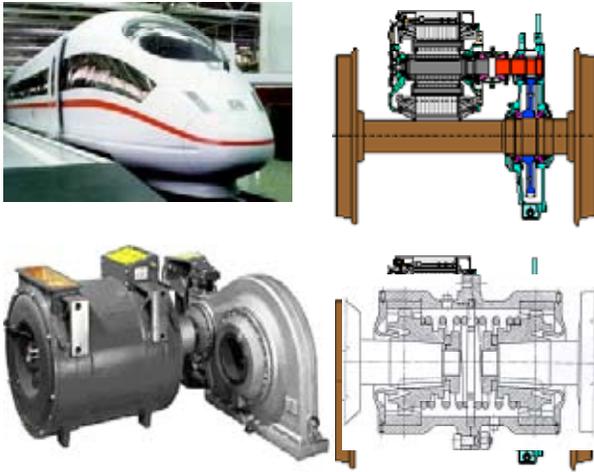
High speed train ICE 3 – drive by outside location of cardan shaft and special tooth clutch
